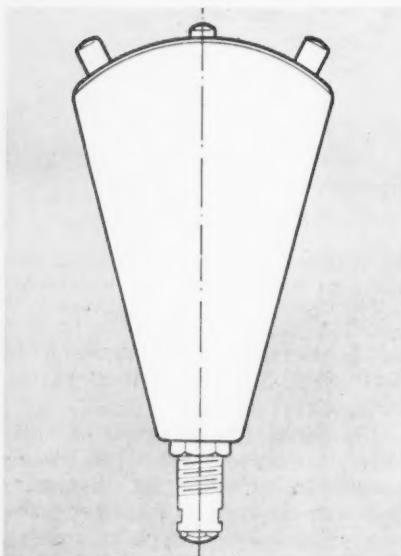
The gaging plunger and opposite gage contact of dial bore gage head must be in line on a common axis, as shown herewith.
